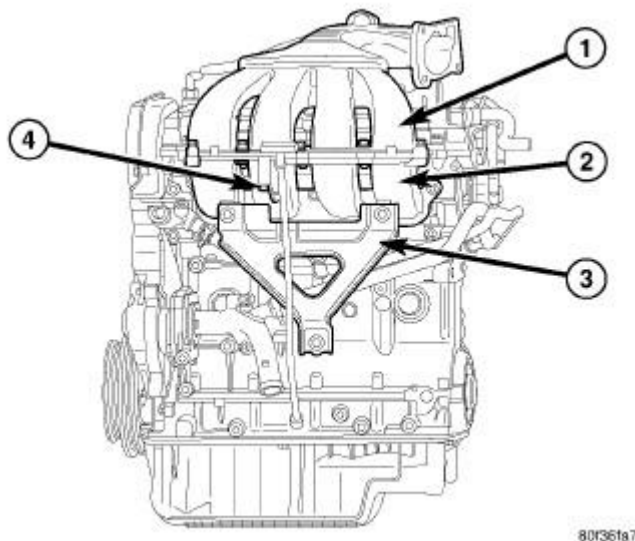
Lower Intake Manifold Support Bracket - 2.4L Turbo
